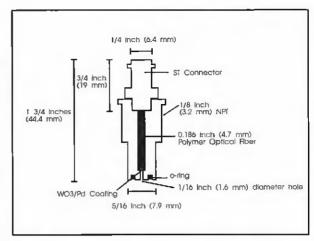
Design for prototype diffusible-hydrogen weld sensor.
